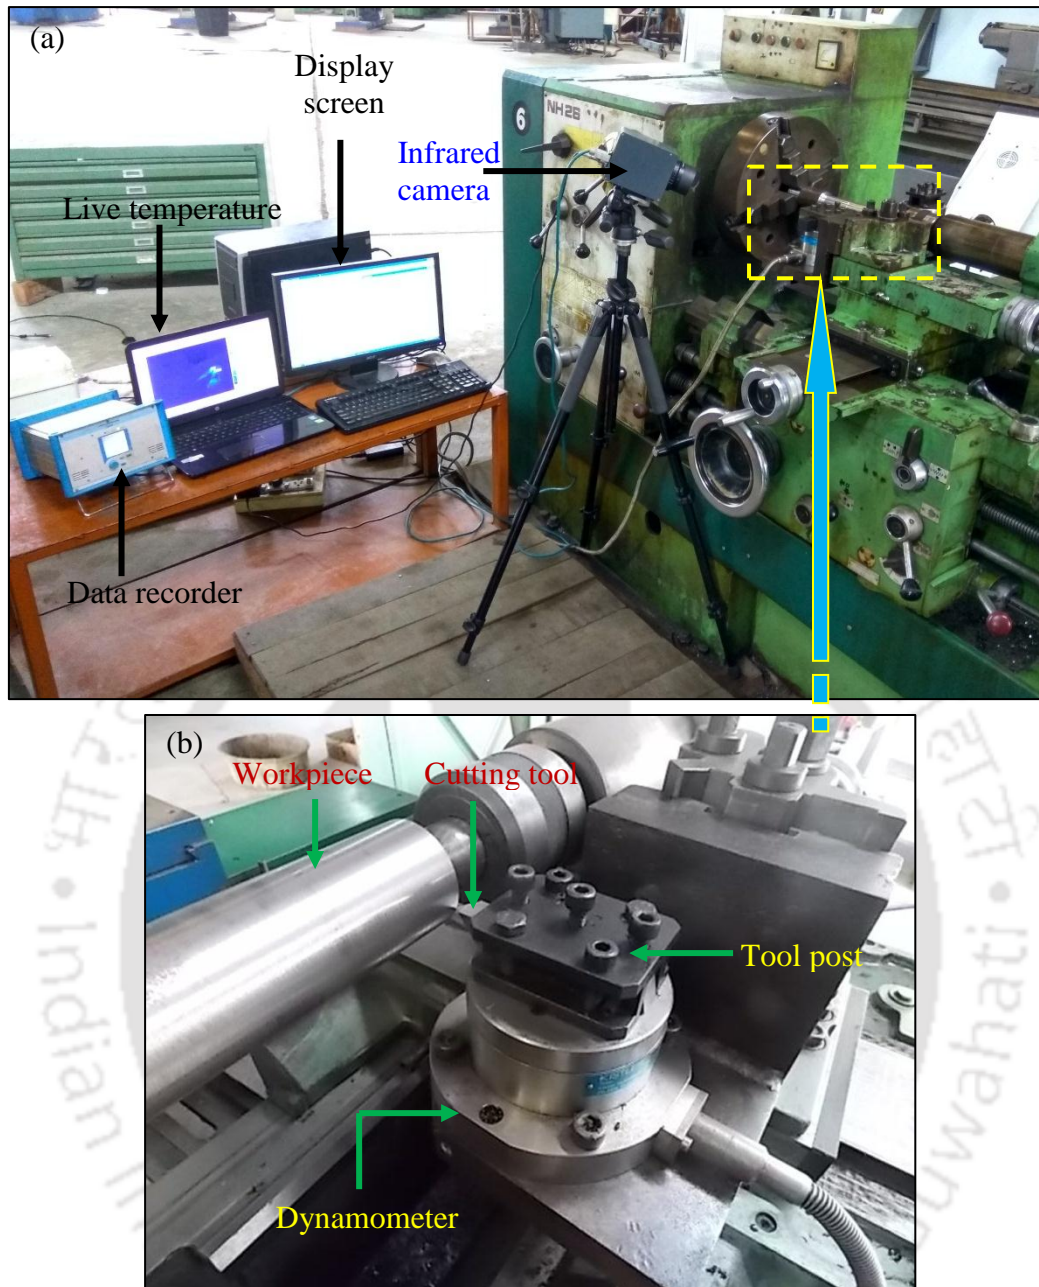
(a) Overview of the experimental machining setup and (b) closeup view of the machining region along the dynamometer, tool post and tool-workpiece interaction
